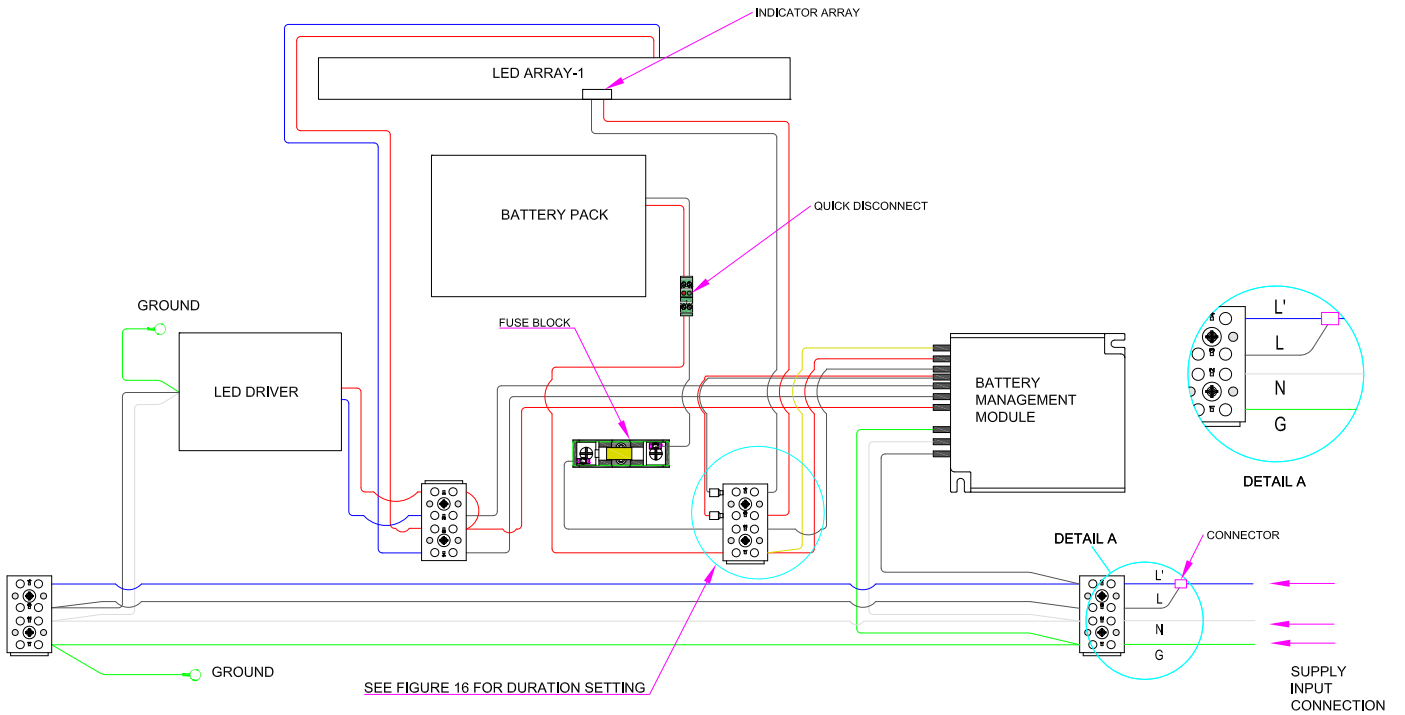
C: STANDARD WIRING 3 WIRE CONNECTION LAYOUT WITH FIXED SCREW TERMINAL: 2FT
